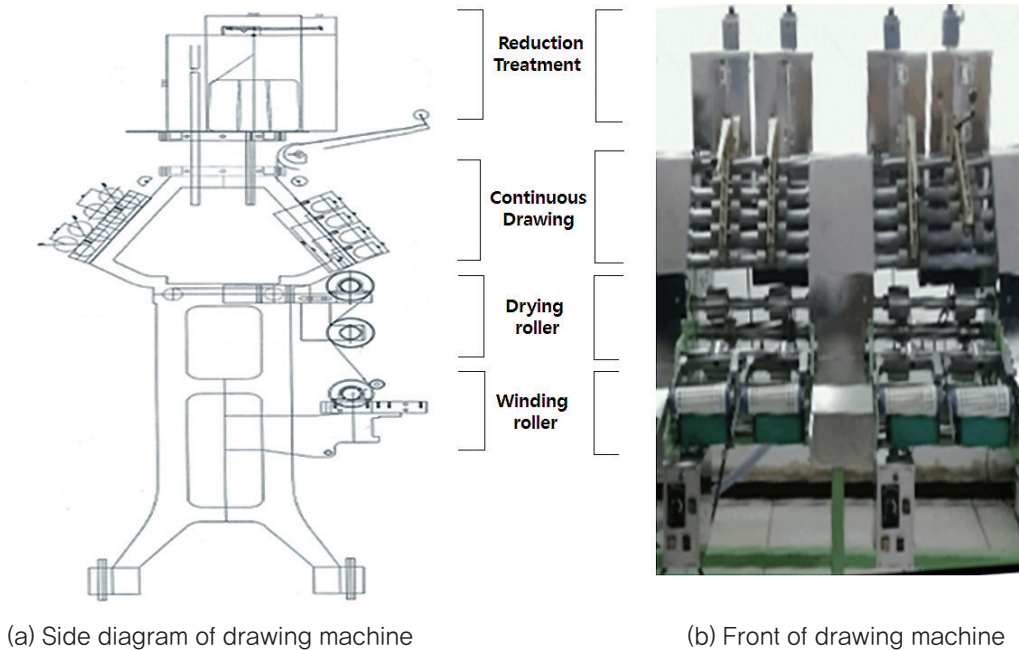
Drawing machine for fineness control on wool and wool blend yarns.
